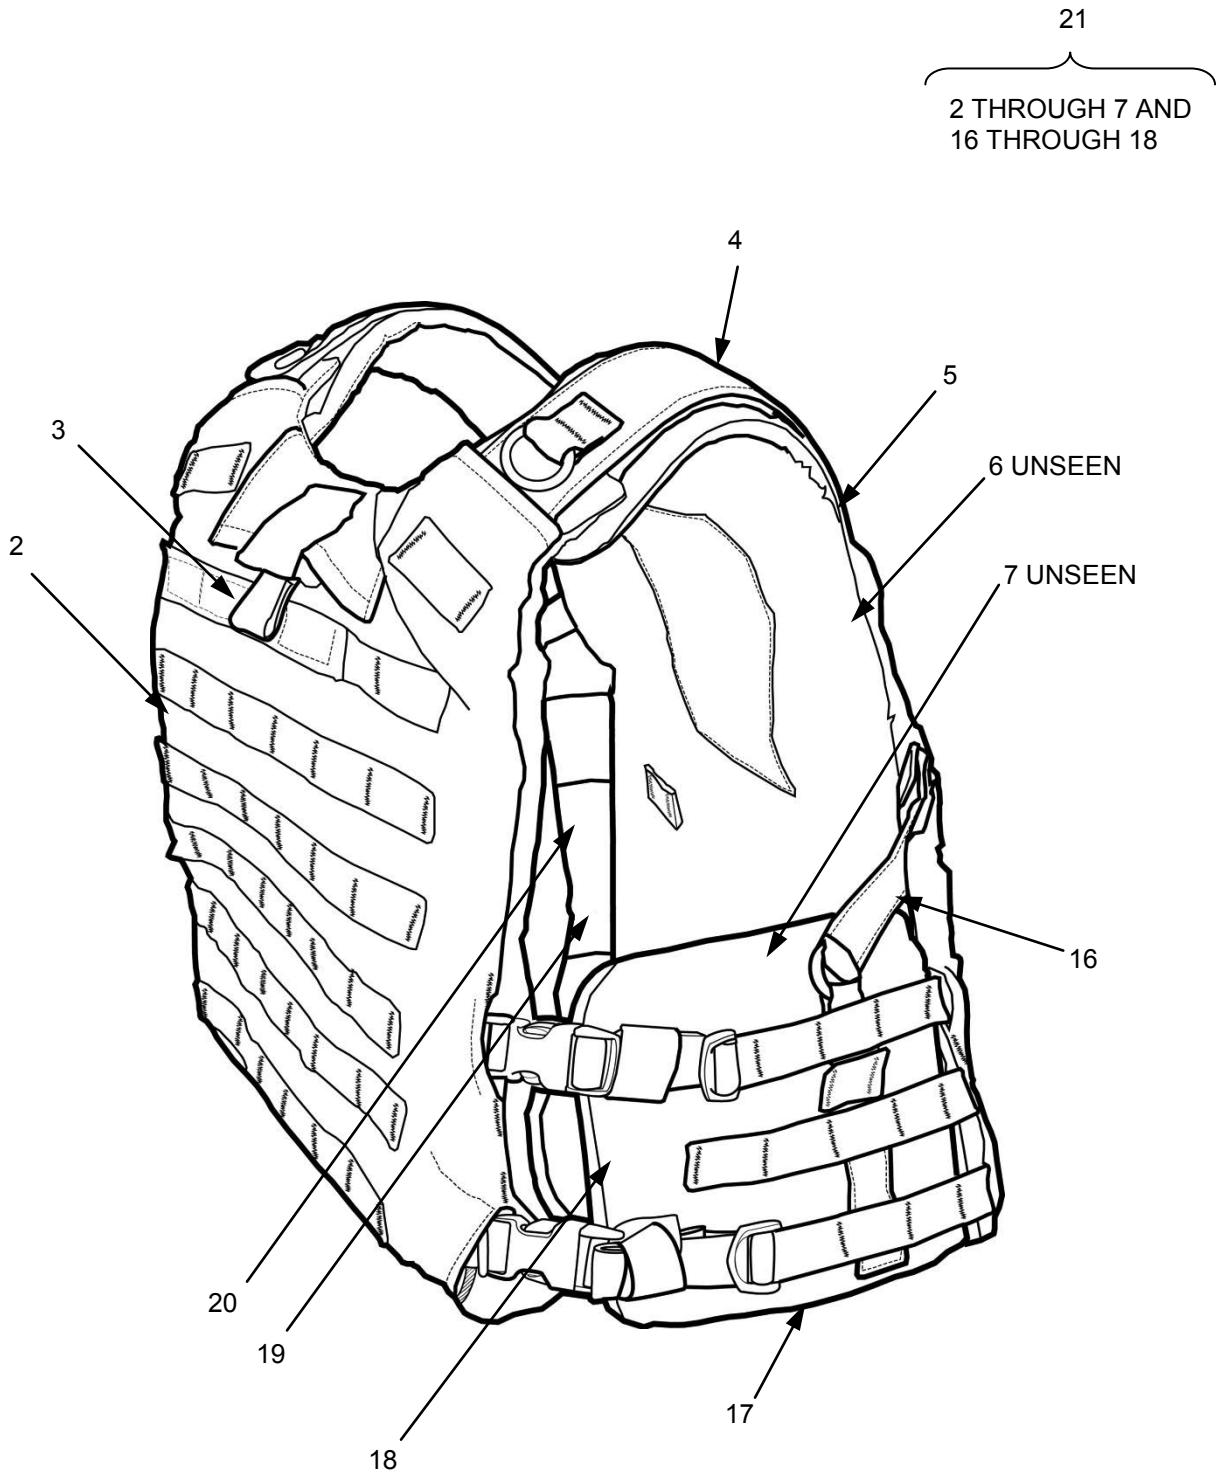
Soldier Plate Carrier System (SPCS) (Sheet 3 of 4).
